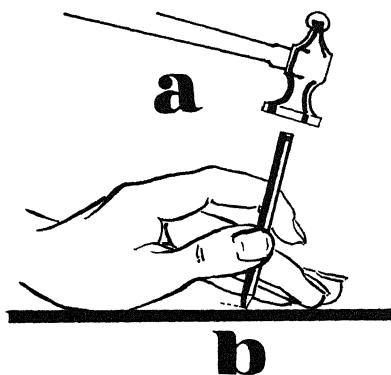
(A) Position of the hammer and (B) the tool when embossing
